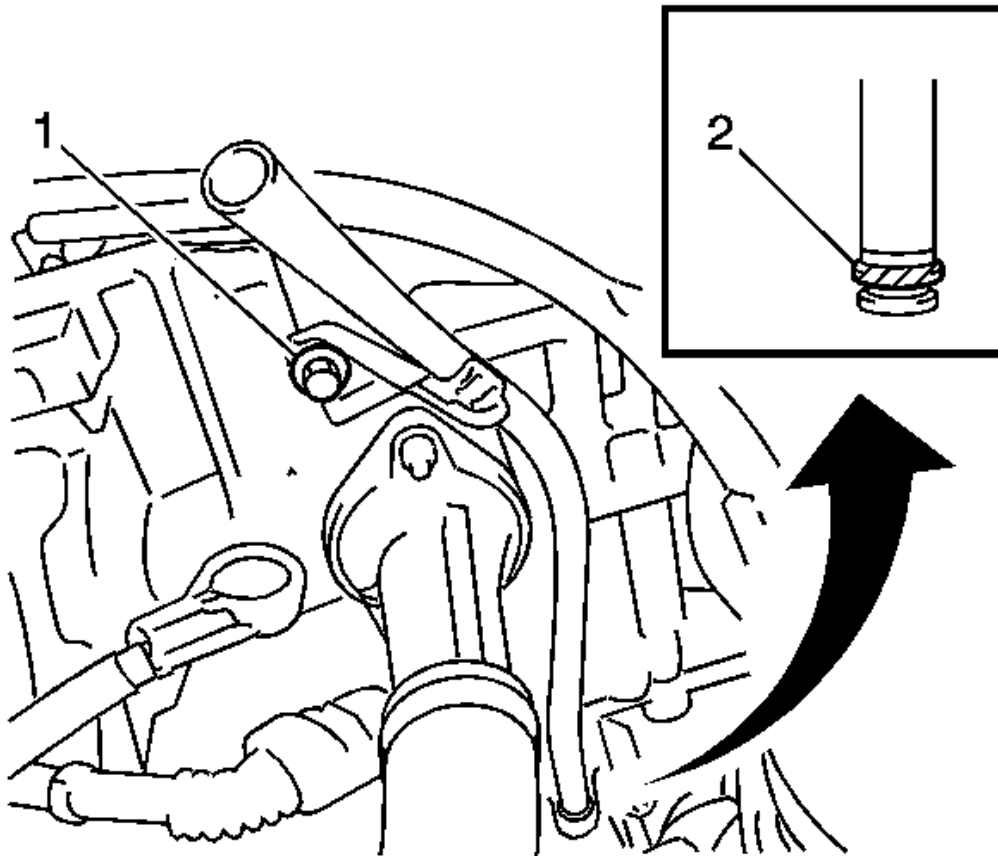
Identifying Engine Oil Level Dipstick Guide & Bolt
